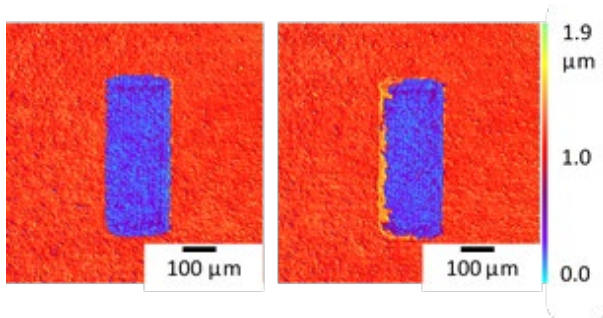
Micro-textured friction jaw, bevor (left) and after (right) strip drawing test against DC04 under dry sliding condition
